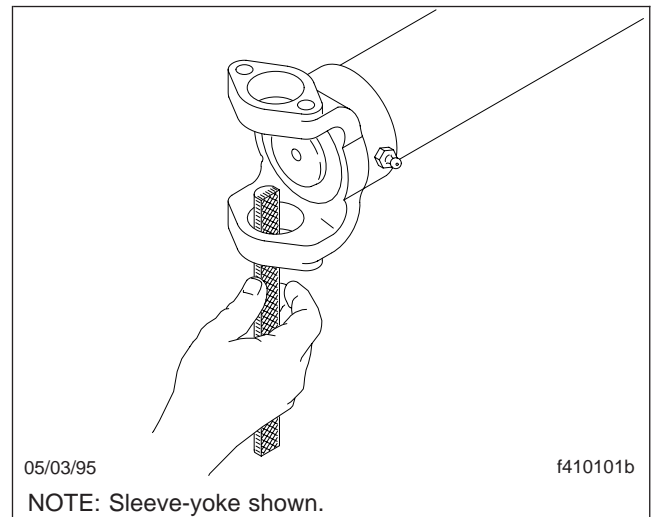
, Removing Burrs From a Full-Round Yoke Cross-Hole
